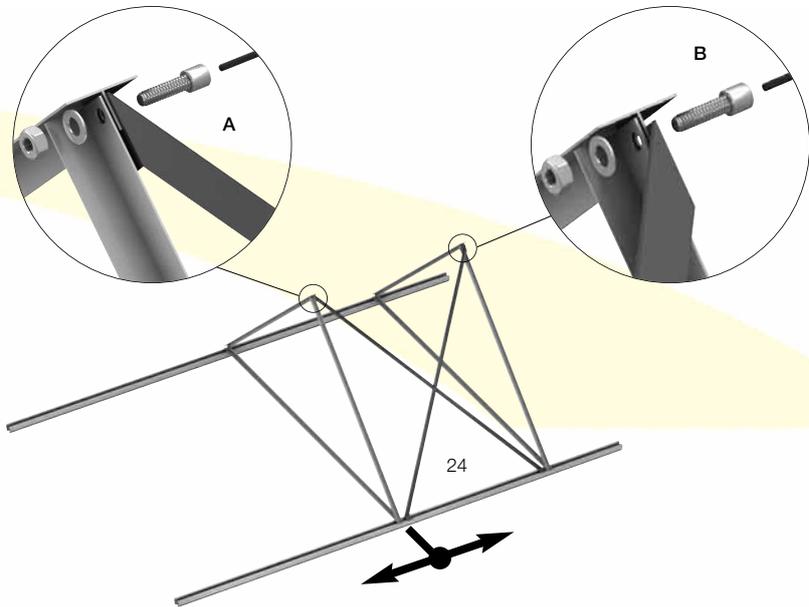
Installation of the Second Flat Roof Mounting Bracket
